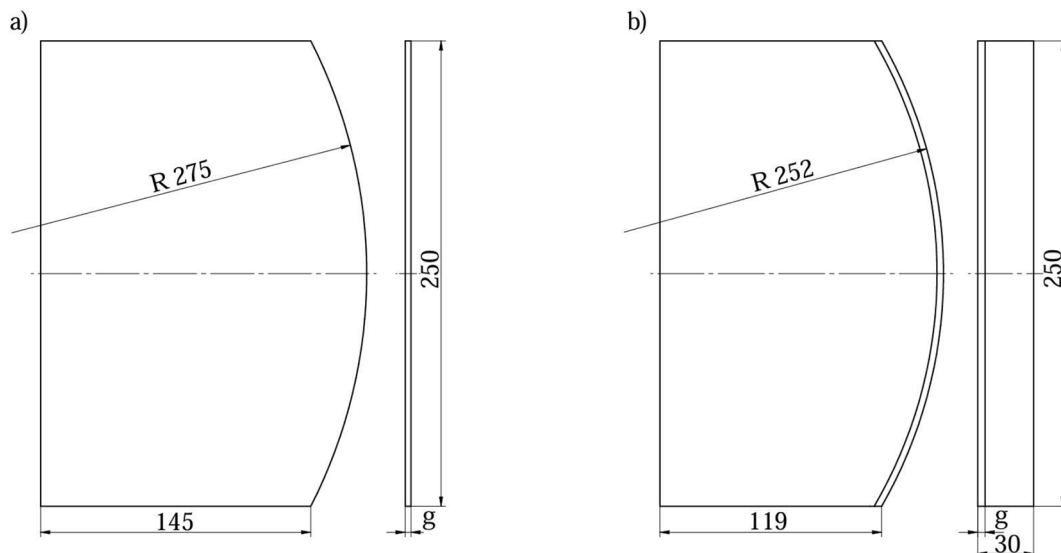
Dimensions: (a) semi-finished product, (b) final product
